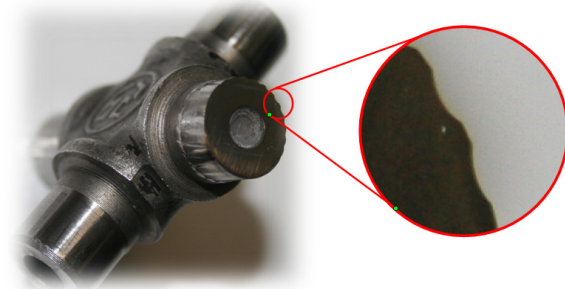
The cross section of an inner ring of a Cardan joint bearing that is severely deformed.
